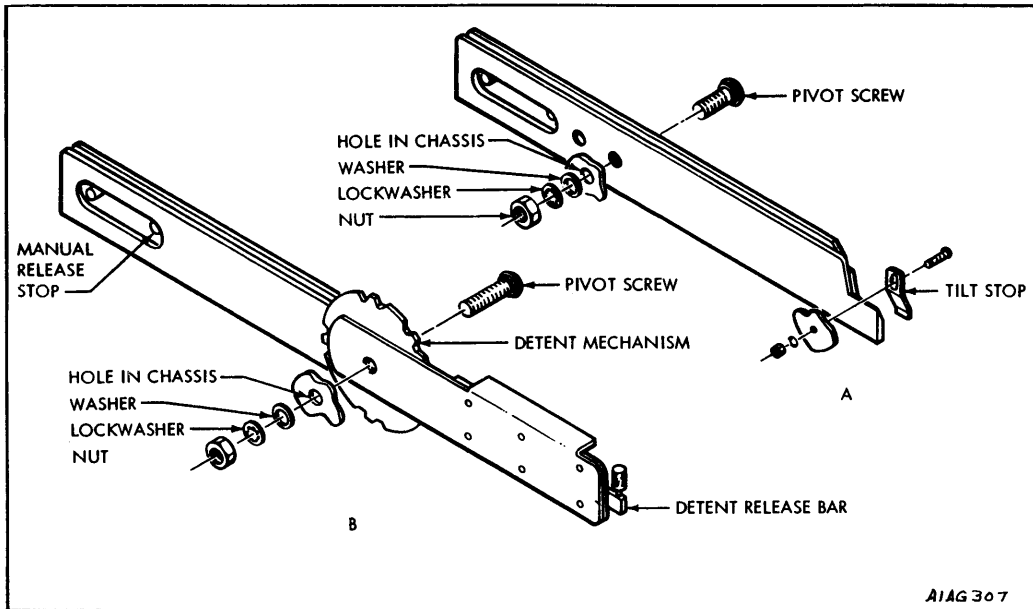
Attaching Chassis to Tilt-Type Slide
